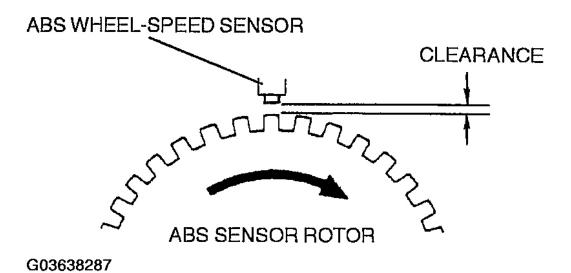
Identifying Clearance Between ABS Wheel-Speed Sensor And Sensor Rotor Courtesy of MAZDA MOTORS CORP.
